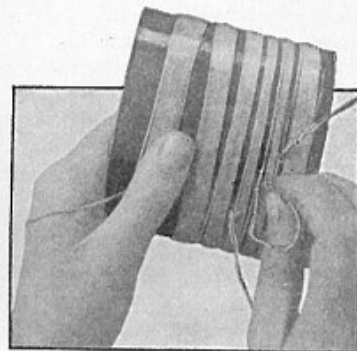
Illustrating method of spacing sections of the coil windings.
